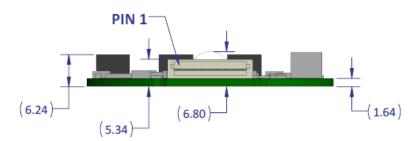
Mechanical dimensions of LuxiTune light engine – without secondary lens
